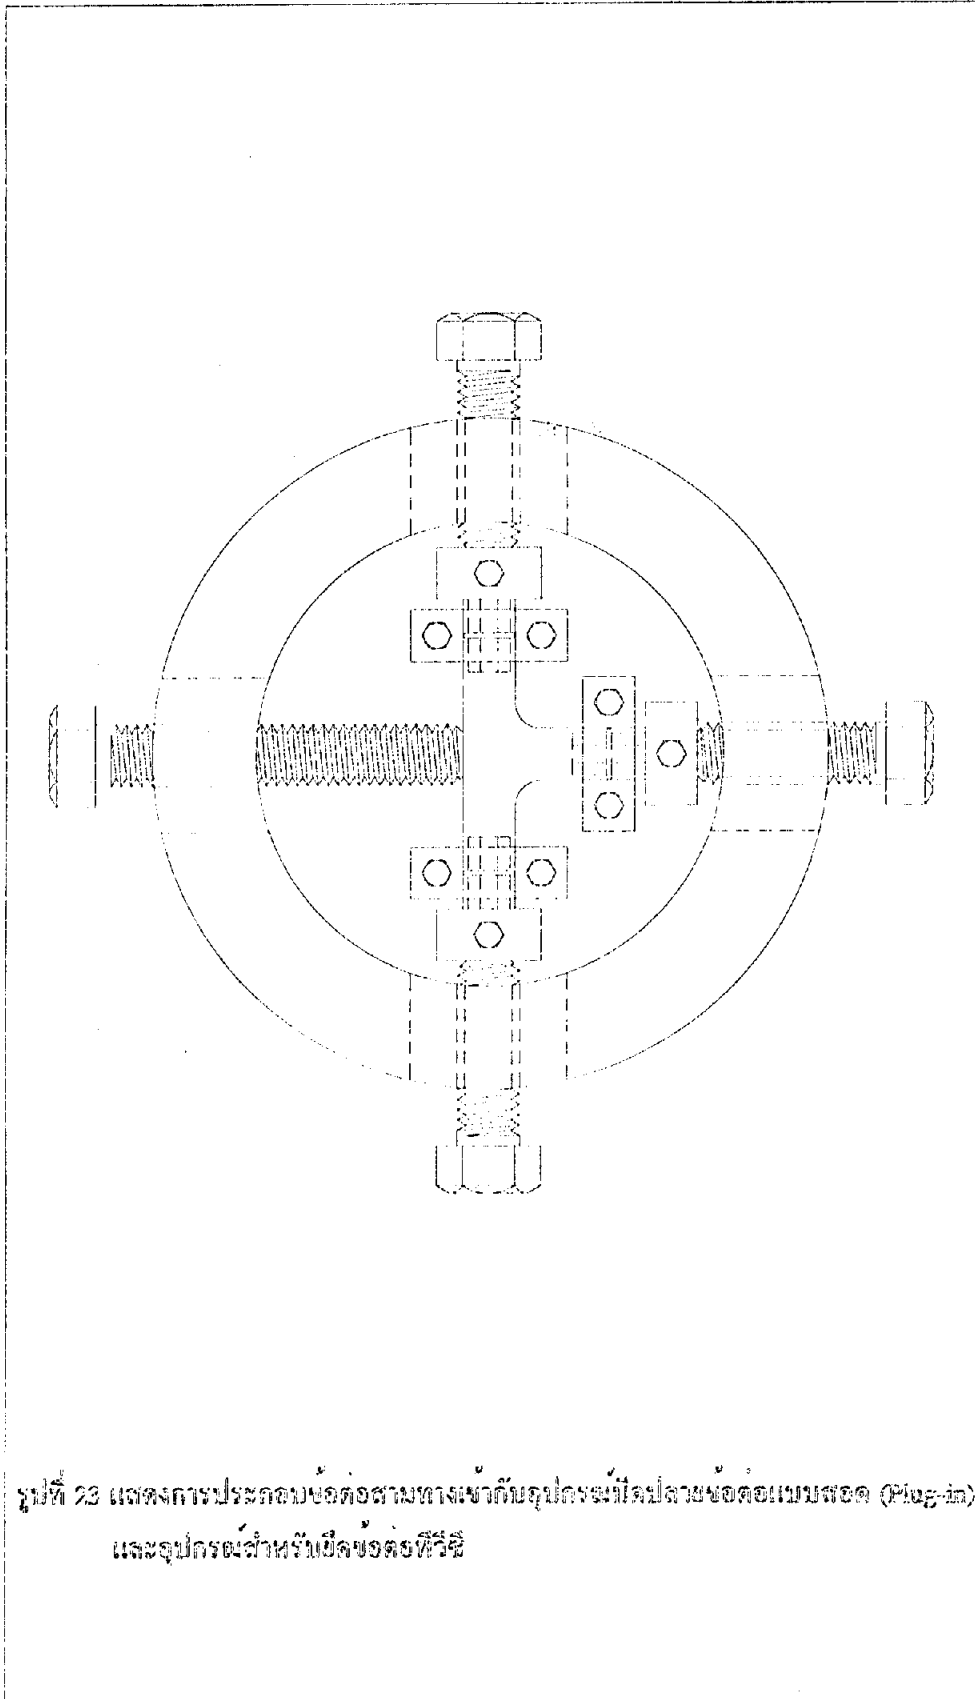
A schematic diagram of a mechanical assembly, showing three rectangular components with hexagonal holes, connected by shafts. The shafts are shown with dashed lines to indicate they are hidden behind the components.
